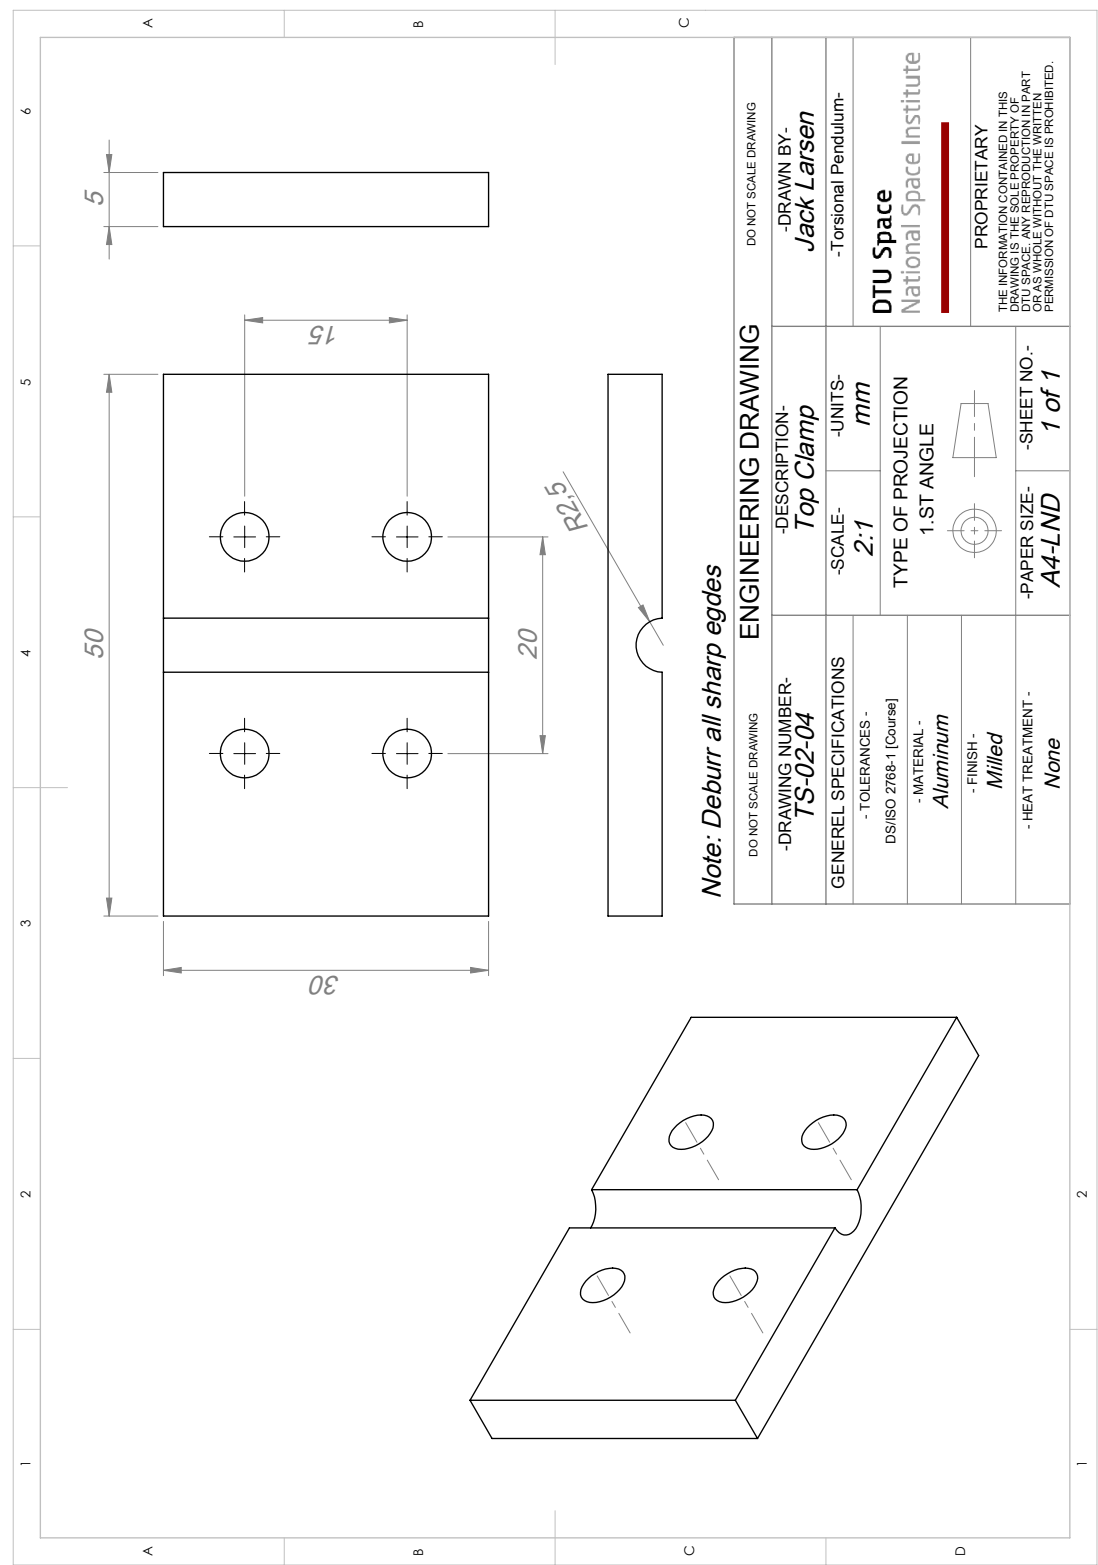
Test Setup: Top clamp for fixing the glass wire.
